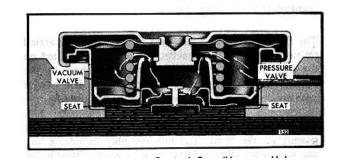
Pressure Control Cap (Vacuum Valve Open)
